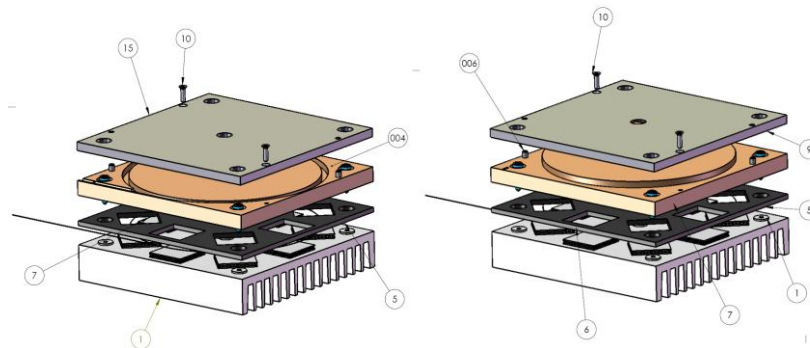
The two configurations of the package v2: the PPSF is placed into U-groove (left) or coiled around a circular plate (right). The different parts are: heat-sink (1), insulation foam (5), TEC compartment (6), copper block (004 & 7), aluminium cover (9 & 15), and alignment pin (006).
